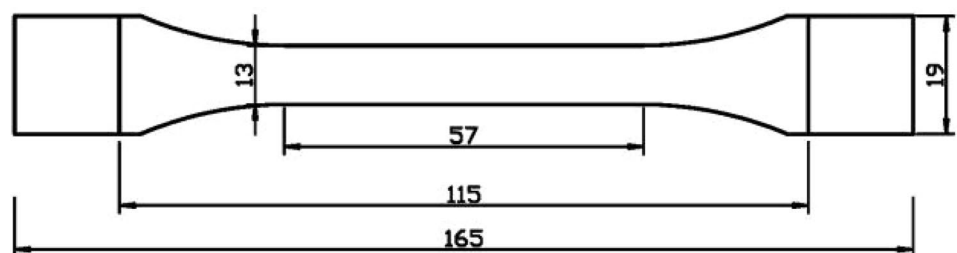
ASTM D638-02a standard dimensions in mm [39]
